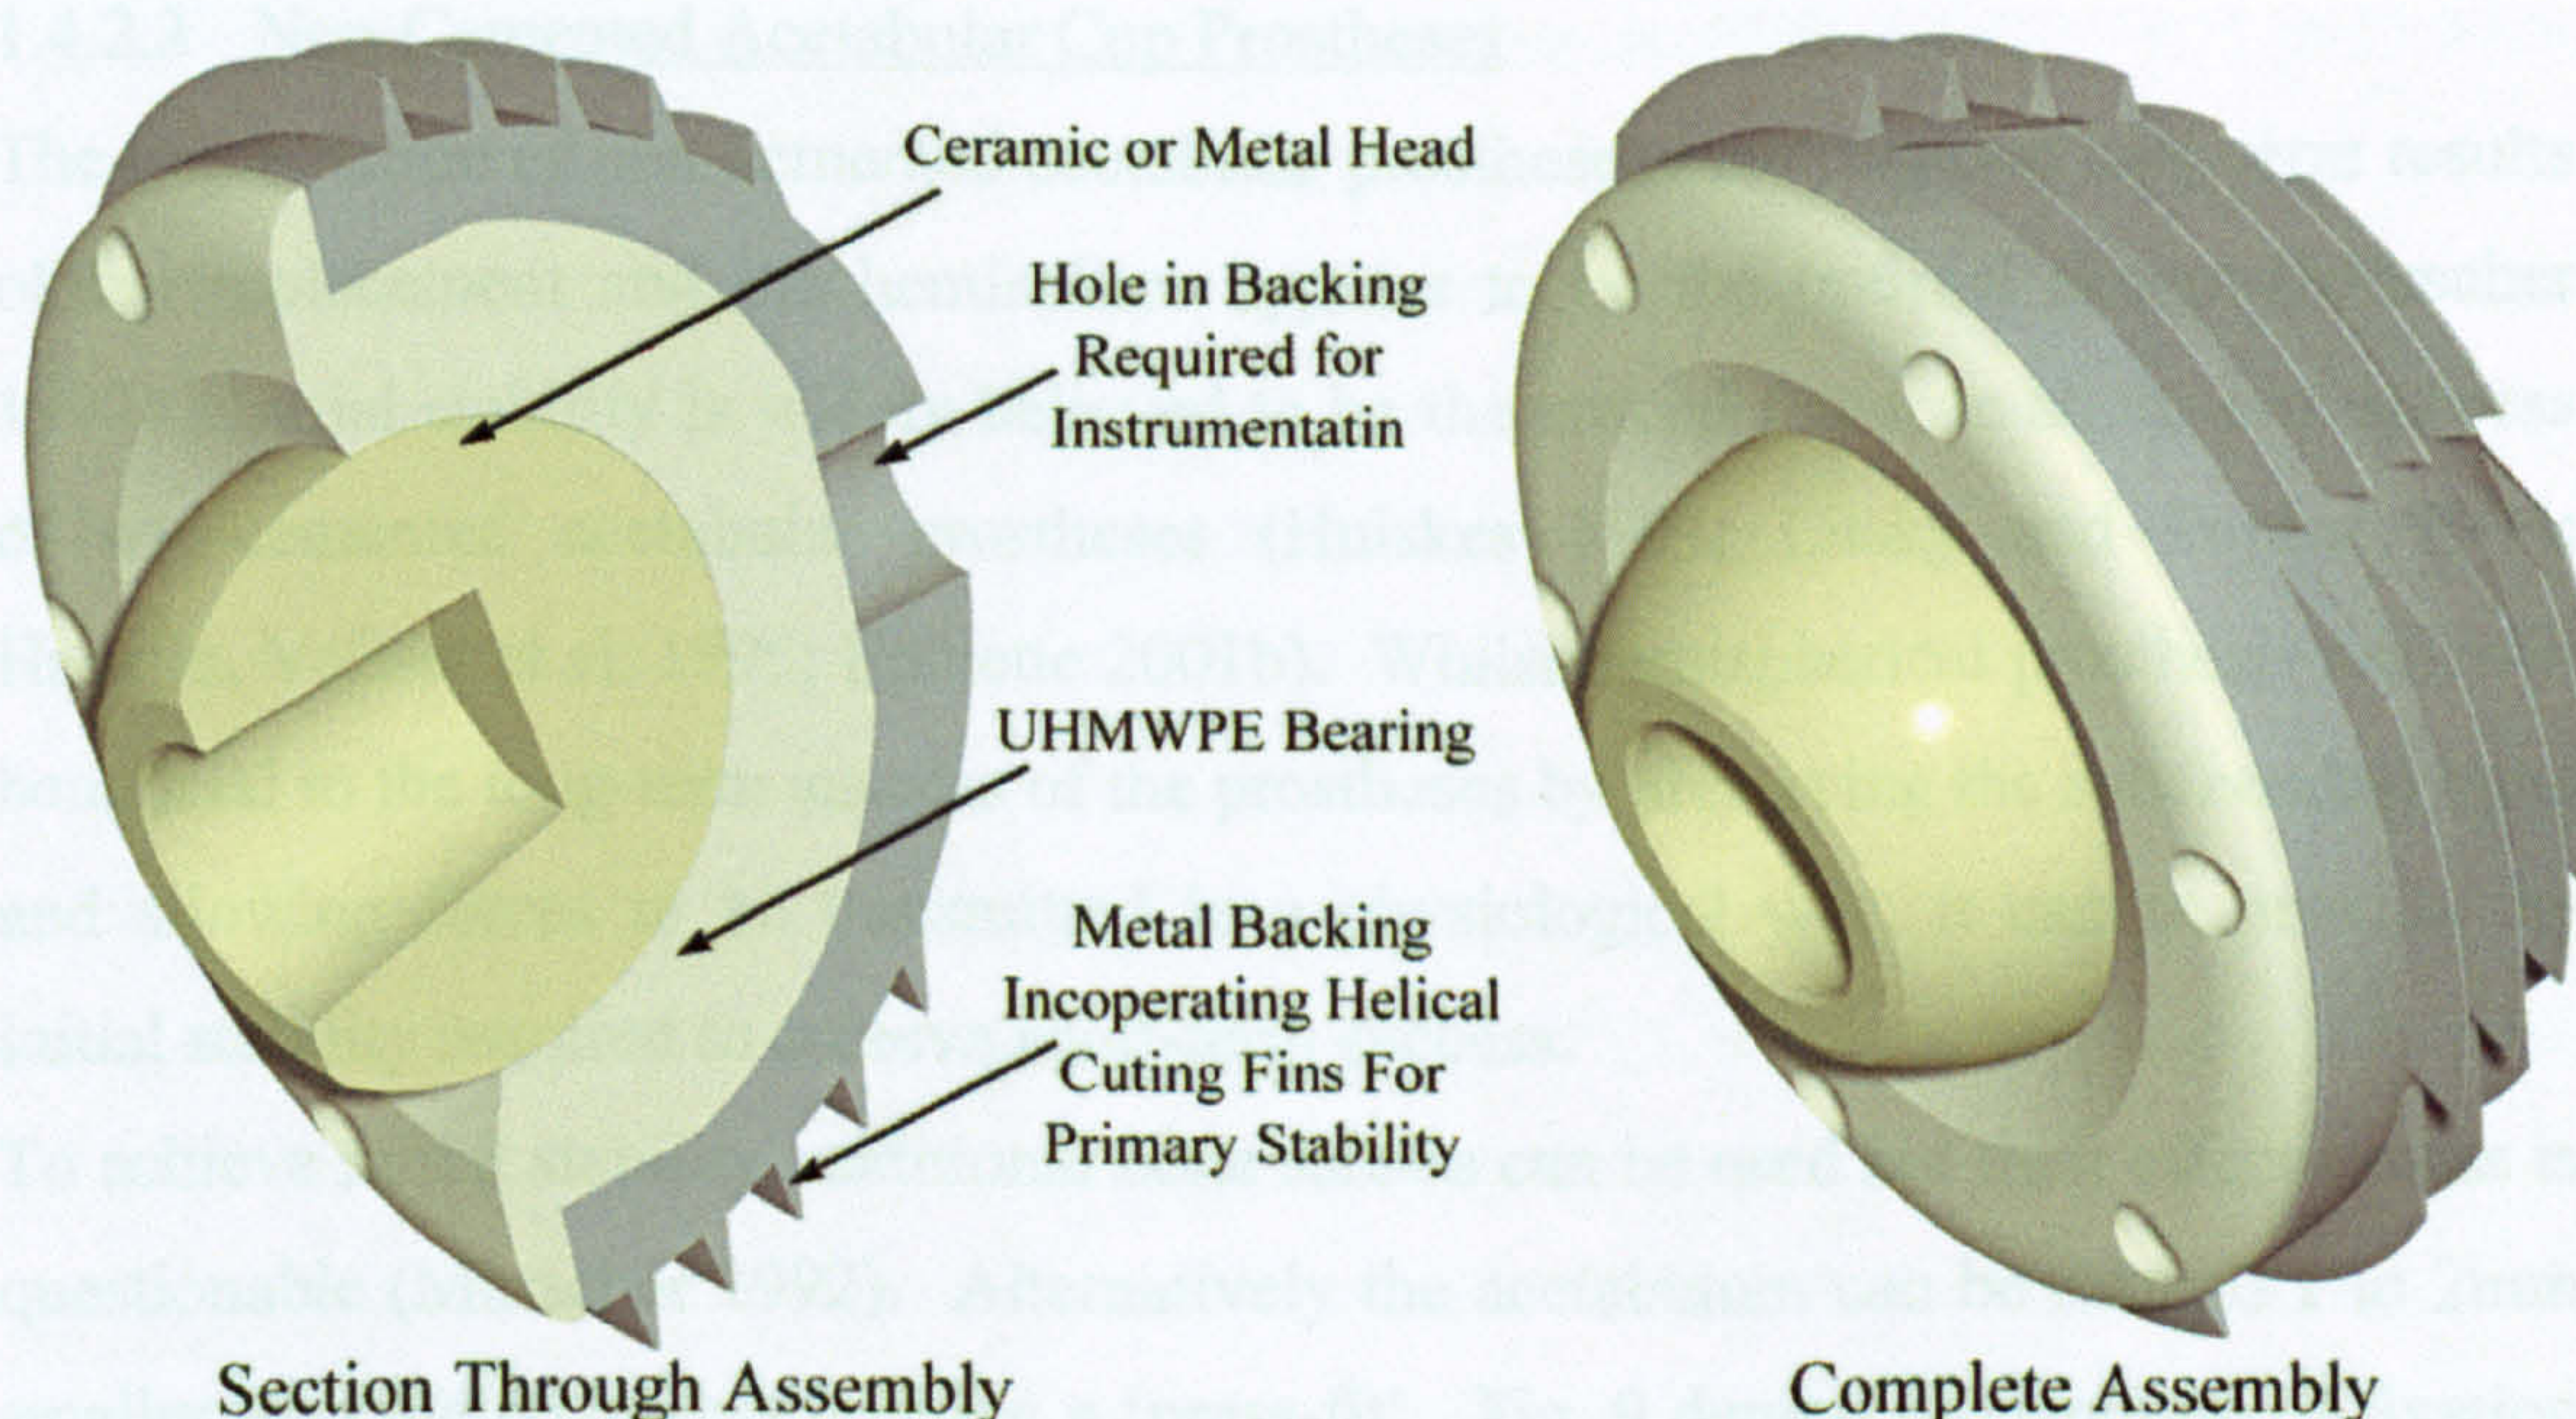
Threaded metal backed UHMWPE acetabular cup and head
